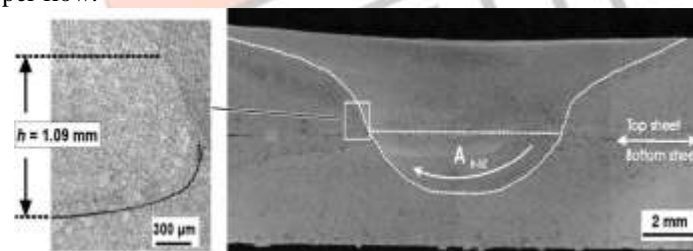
Cross sectional view of an A6060 weld made using  $\omega = 1,000$  rpm and  $v = 224$  mm/min displaying a hook and indicating FS flow direction
